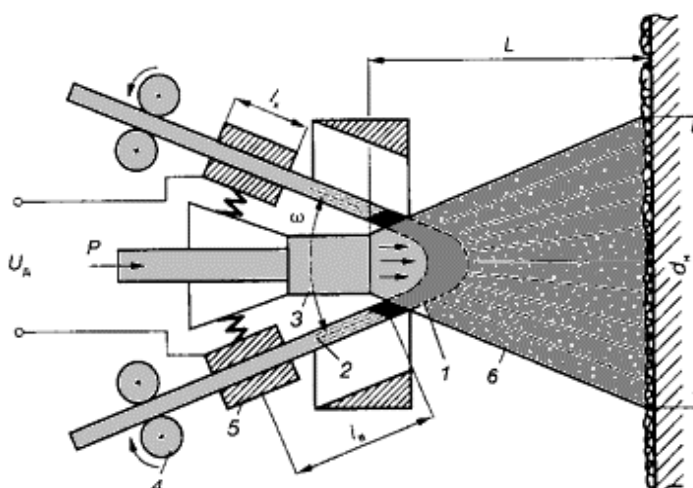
Scheme of arc spraying process: 1 – electric arc; 2 – wire; 3 – nozzle; 4 – wire feeding mechanism; 5 – contact devices; 6 – spraying material jet; l_v – the length of wire overhang; U_d – voltage
